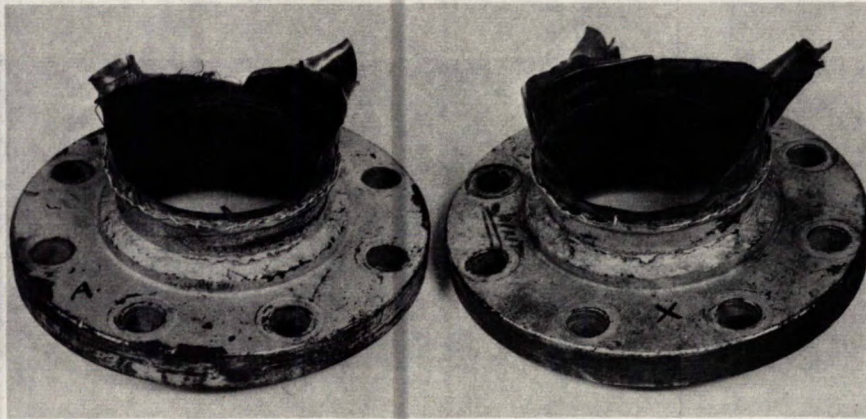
Two free flanges from No. 1 and No. 2 joints. Similarity of inner tube fractures suggests that fracture mechanisms were essentially similar. Outer brass collar has been peeled back to facilitate examination.
